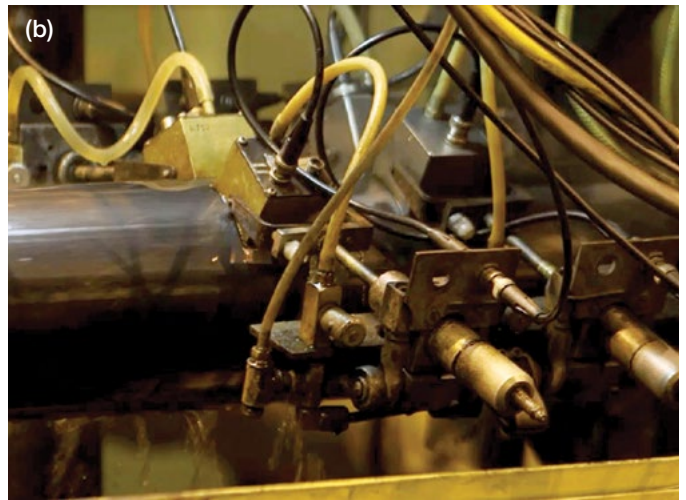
(a) and 2(b): A continuous ribbon of steel, up to 11/16 in. (17 mm) thick at this mill, is unrolled and fed into the tube welding mill. Rollers progressively curl the sheet into a tube. Induction coils heat the edges of the ribbon and rollers press the edges together to the final tubing diameter, creating a weld seam. Sensors monitor weld seam quality immediately after the tubing is welded (Photos courtesy of ArcelorMittal Shelby)
